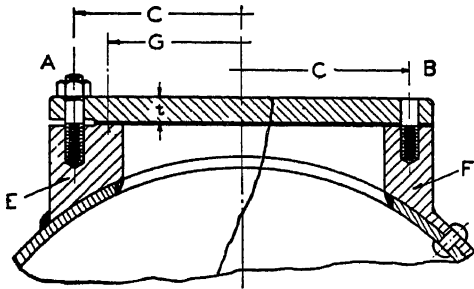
Removable Flat Heads and Blind Flanges.
